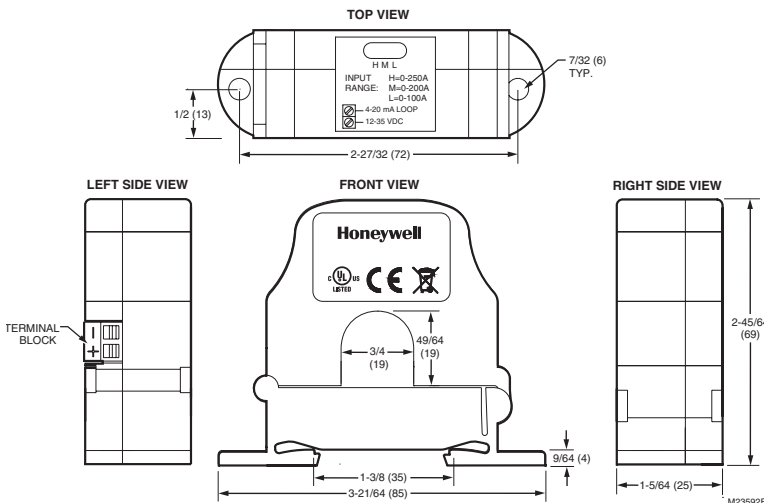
CTP-20 Current Sensor Dimensions in Inches (mm).
